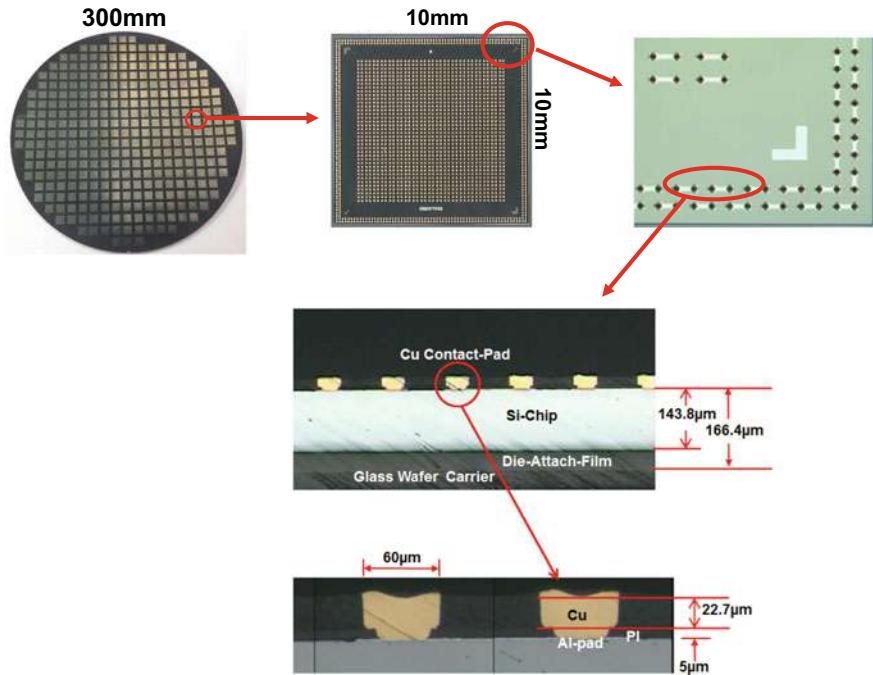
shows the test chip ( $10 \text{ mm} \times 10 \text{ mm}$ ) for a fan-out (chip-first and face-up) packaging. It can be seen that a Cu contact-pad (or stud) has been plated up from the Al-pad of the chip.
